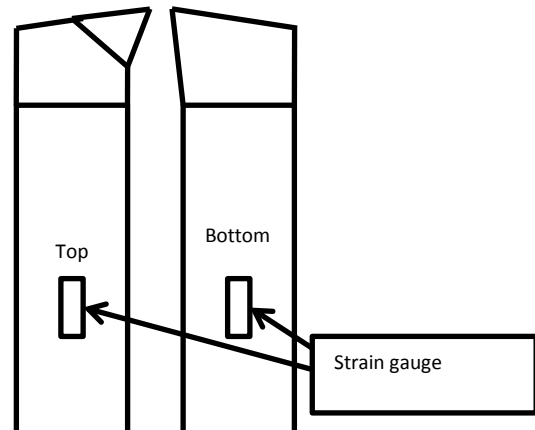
Strain gauge position on the tool holder to measure the cutting forces
